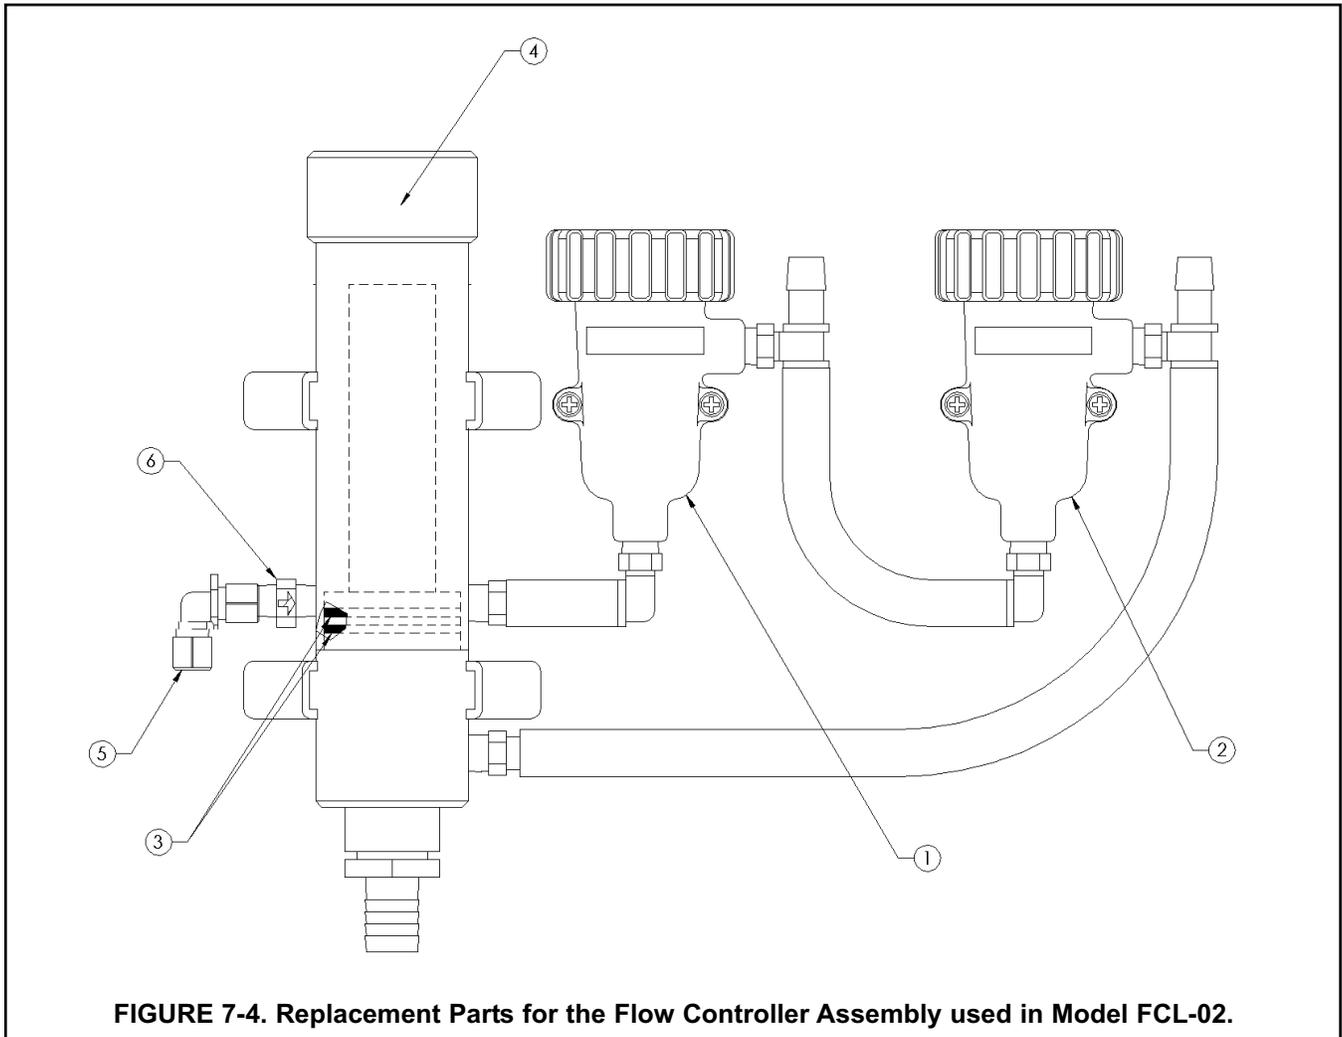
Replacement Parts for the Flow Controller Assembly used in Model FCL-02.
